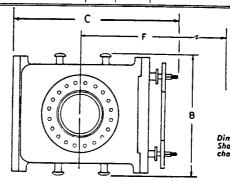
Dimensional Plan — Shafter Type 45 Mechanical Double Control Gate
